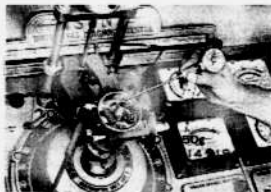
Checking Breaker Point Spring Tension W0869
